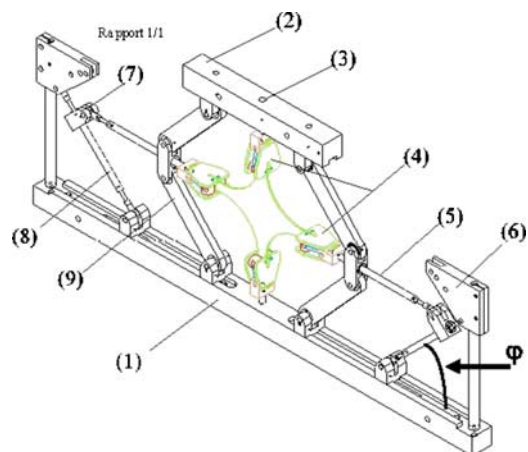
Schematic layout of the biaxial tensile test mechanism.
